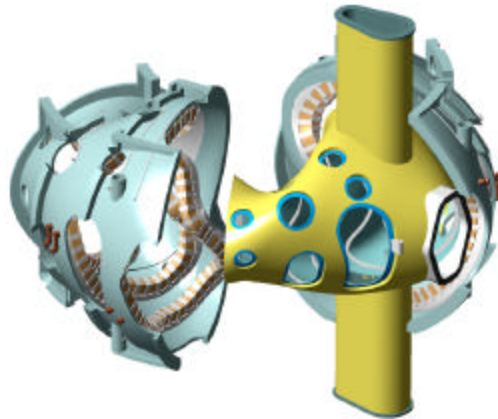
Modular coils being assembled over vacuum vessel sub-assembly
